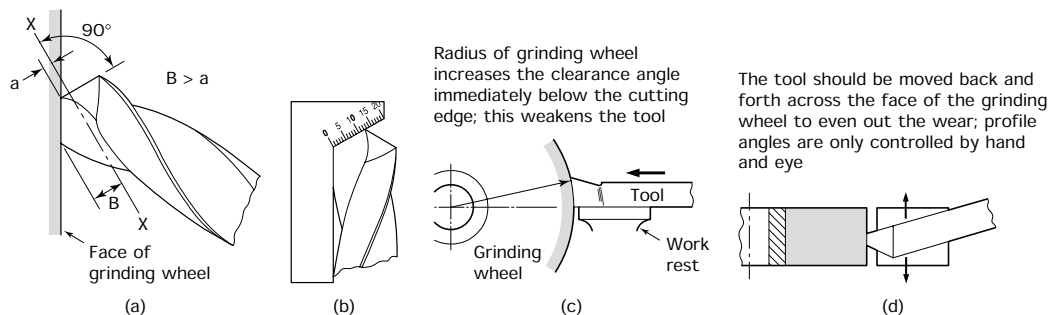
Sharpening drills and lathe tools: (a) off-hand grinding a drill point; (b) twist drill point angle and lip length gauge; (c) grinding the clearance angle; (d) grinding the plan profile
